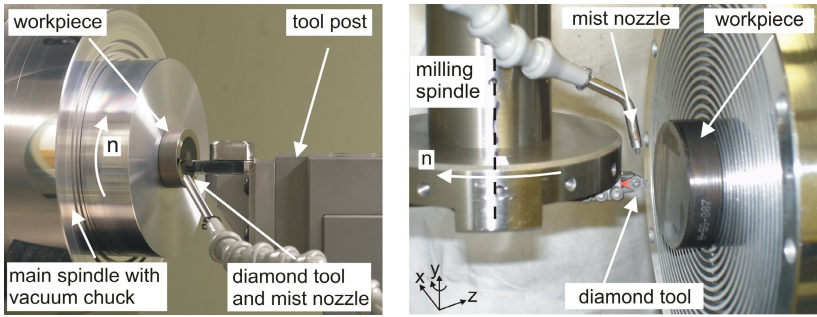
Diamond turning (left) and diamond milling (right) set-ups on ultra-precision machine tools
